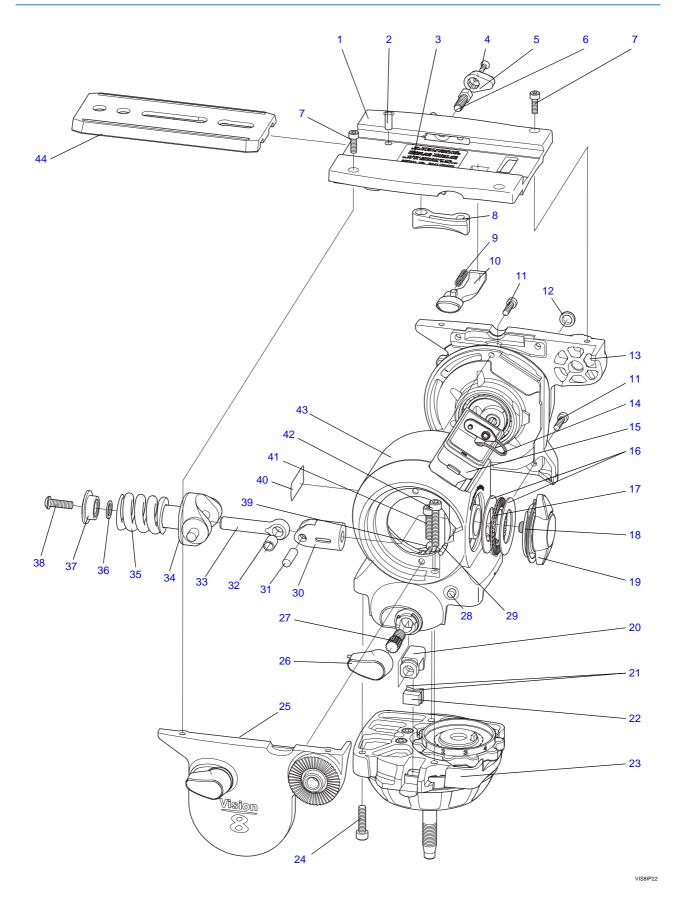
Vision 8 (Black) Pan and Tilt Head - Main Unit Assembly
